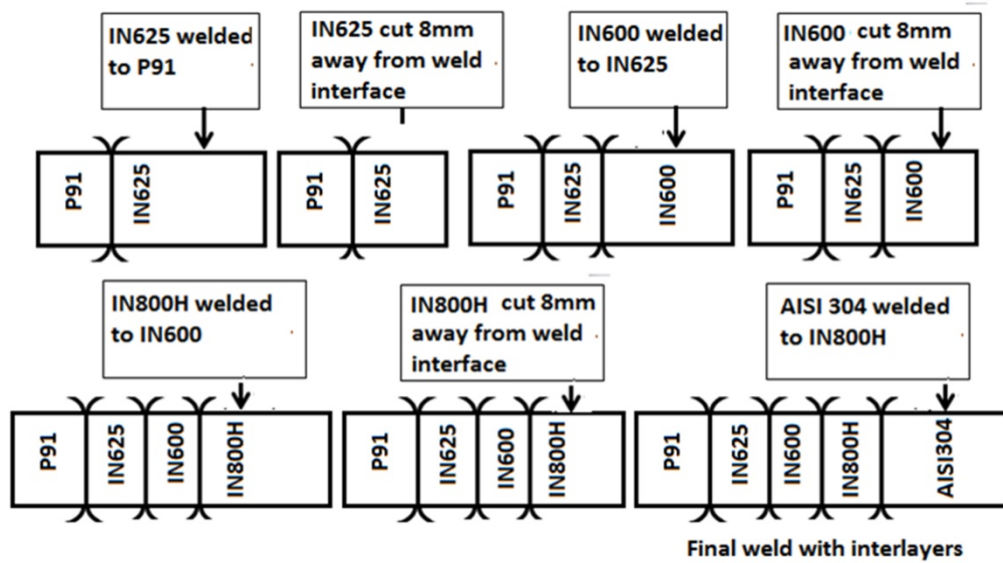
Steps involved in making P91/AISI 304 weld transition joints.
